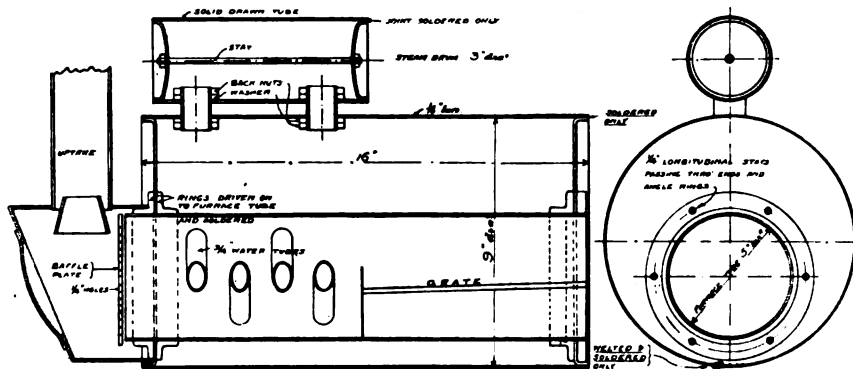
BOILER OF THE MODEL STEAMER, "AMY HOWARD."
